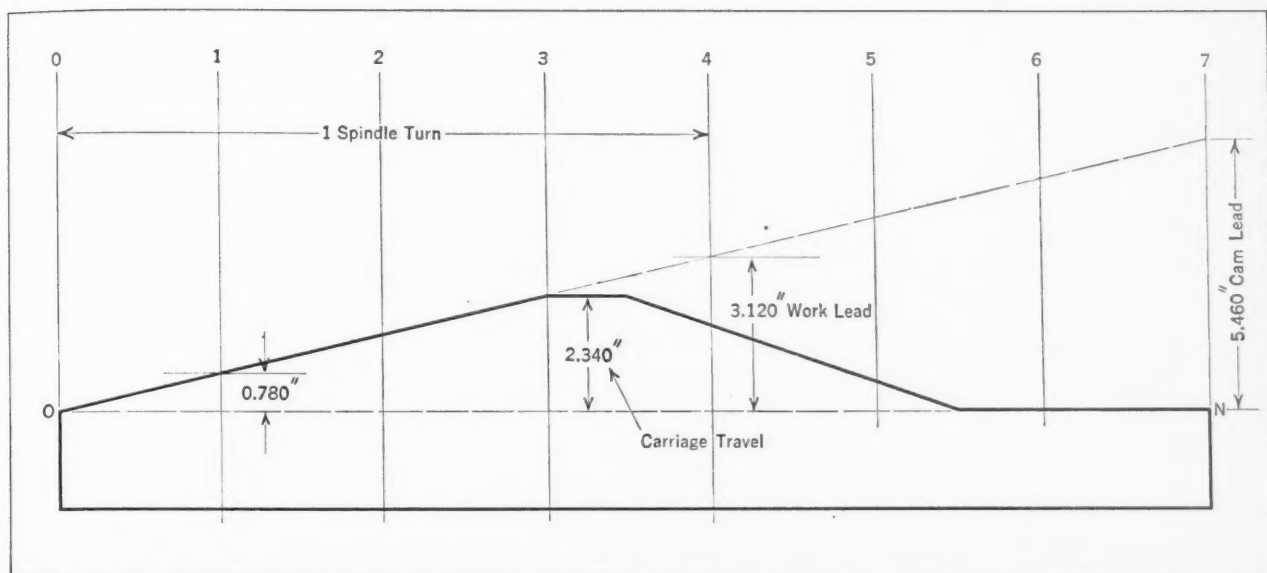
Development of the Cam for Cutting the Multiple Thread on the Sleeve Shown in Fig. 1
